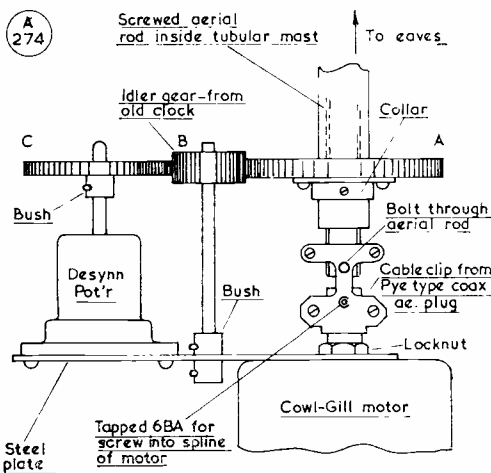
Cowl-gill motor drive layout to the Quad assembly described by G3KGN. It also has a remote-control potentiometer for beam directivity indication.
